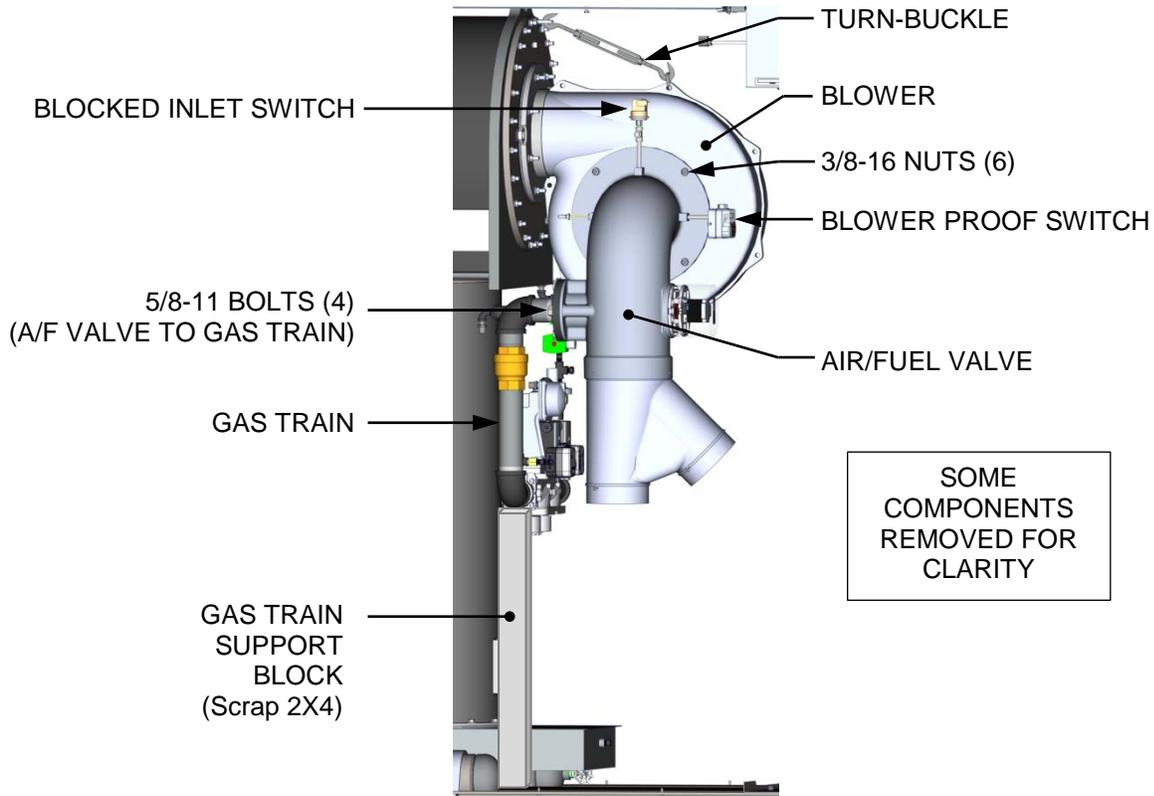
Burner Assembly Mounting Details – Left Side View
